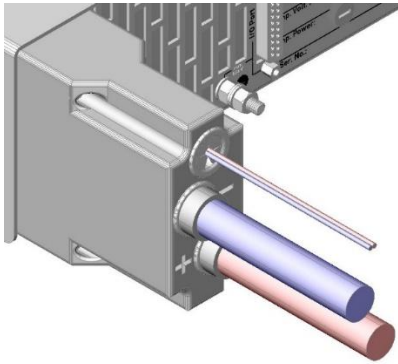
fully assembled safety cover SAB-HES-2CU
